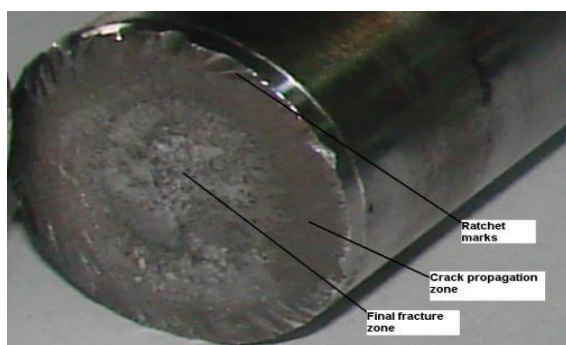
Fracture Surface of a shaft under fatigue loading
